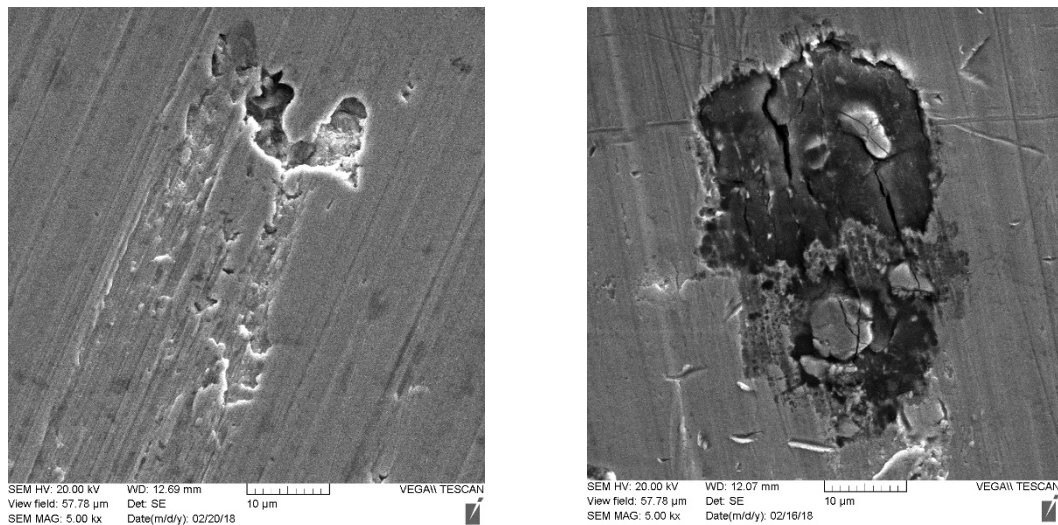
Surface damage and wear signs on the machined inconel surface in the forms of pits and cracks
